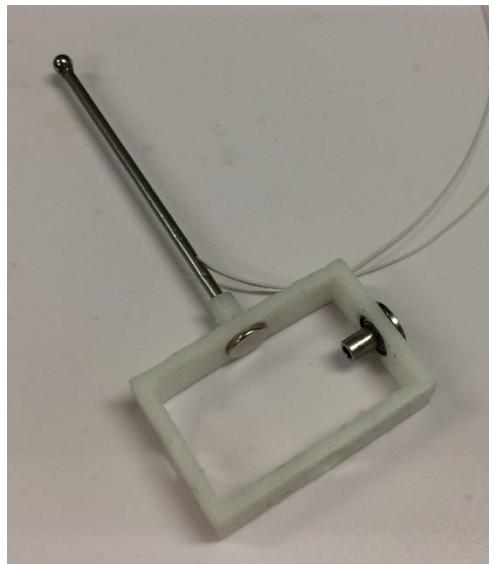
Gimbal rectangle, showing bearing, post, and magnet successfully fitting.
